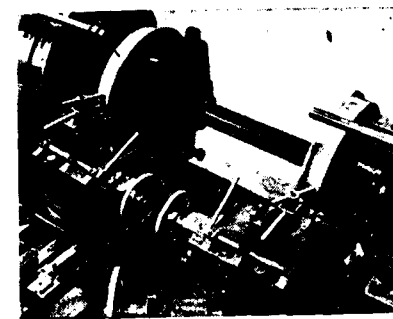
4'-0" Face plate C & W wheel lathe of craven make with turret type tool rests.
